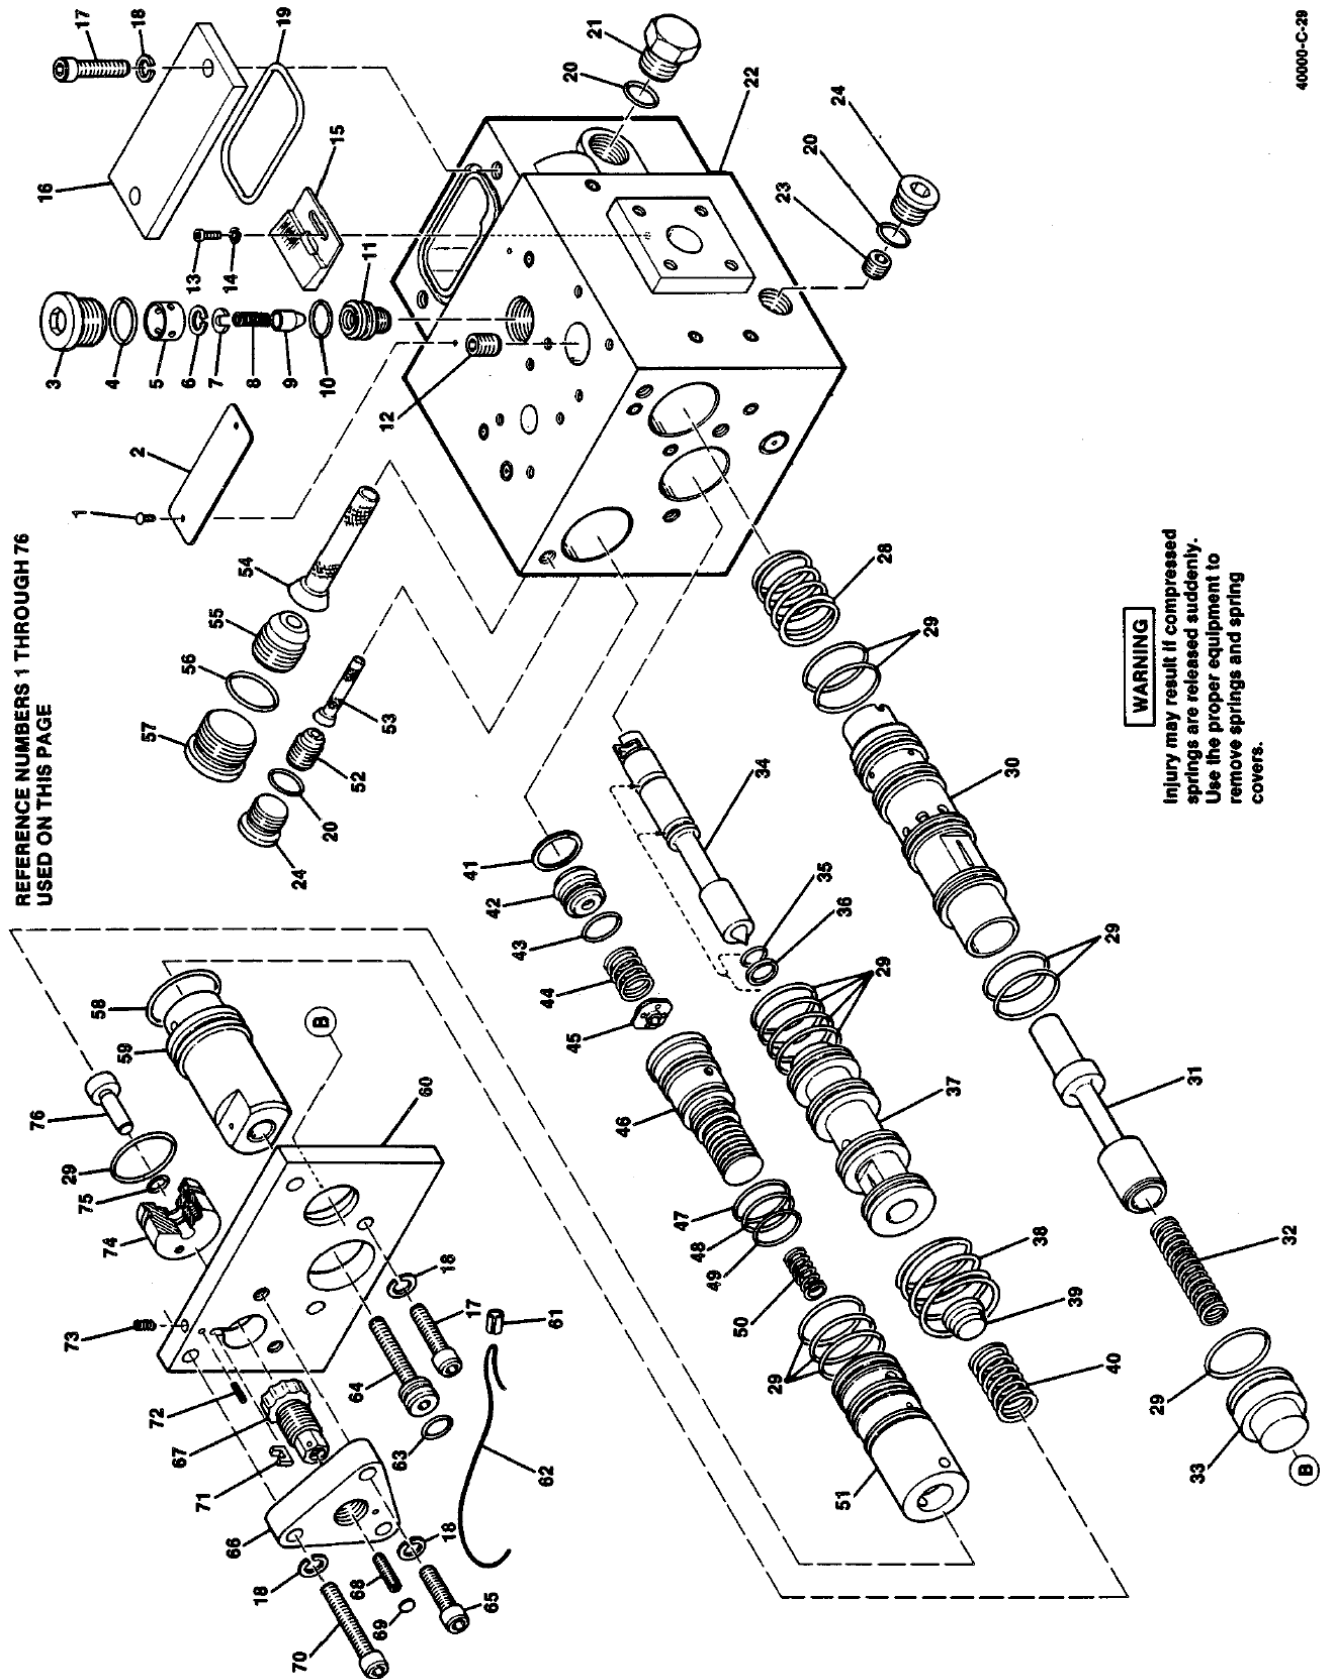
Parts for the 3145 Liquid Fuel Valve
